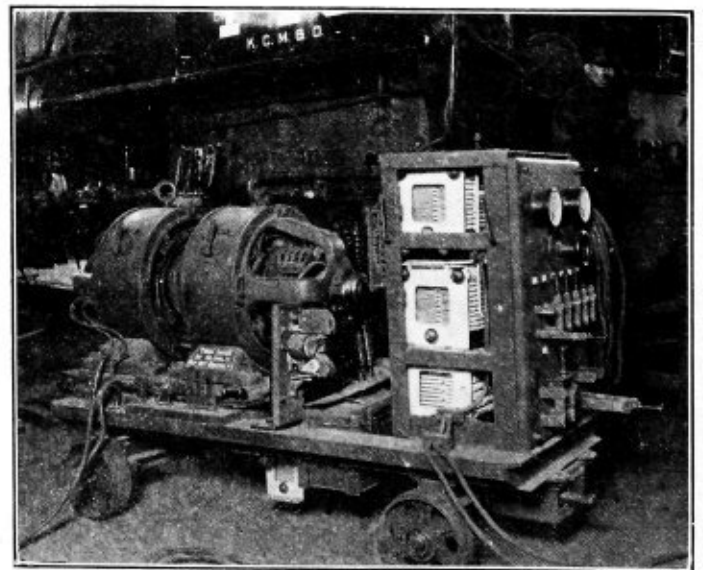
Westinghouse Electric Arc Welding Motor Generator Set Used in Orient Shops, Wichita, Kan.
